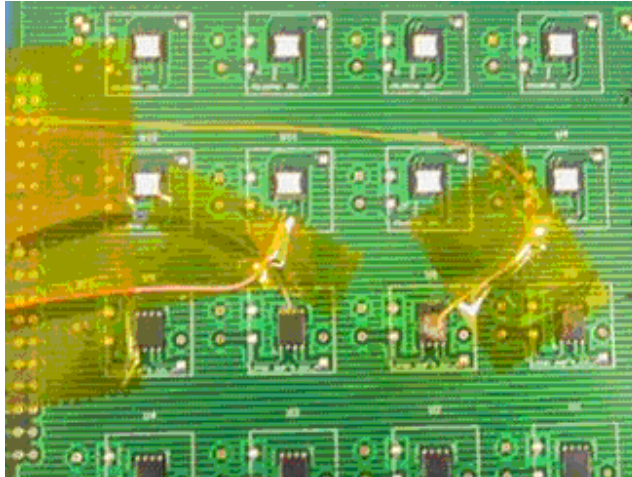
Arrangement of Thermocouple on PCB During Rework
